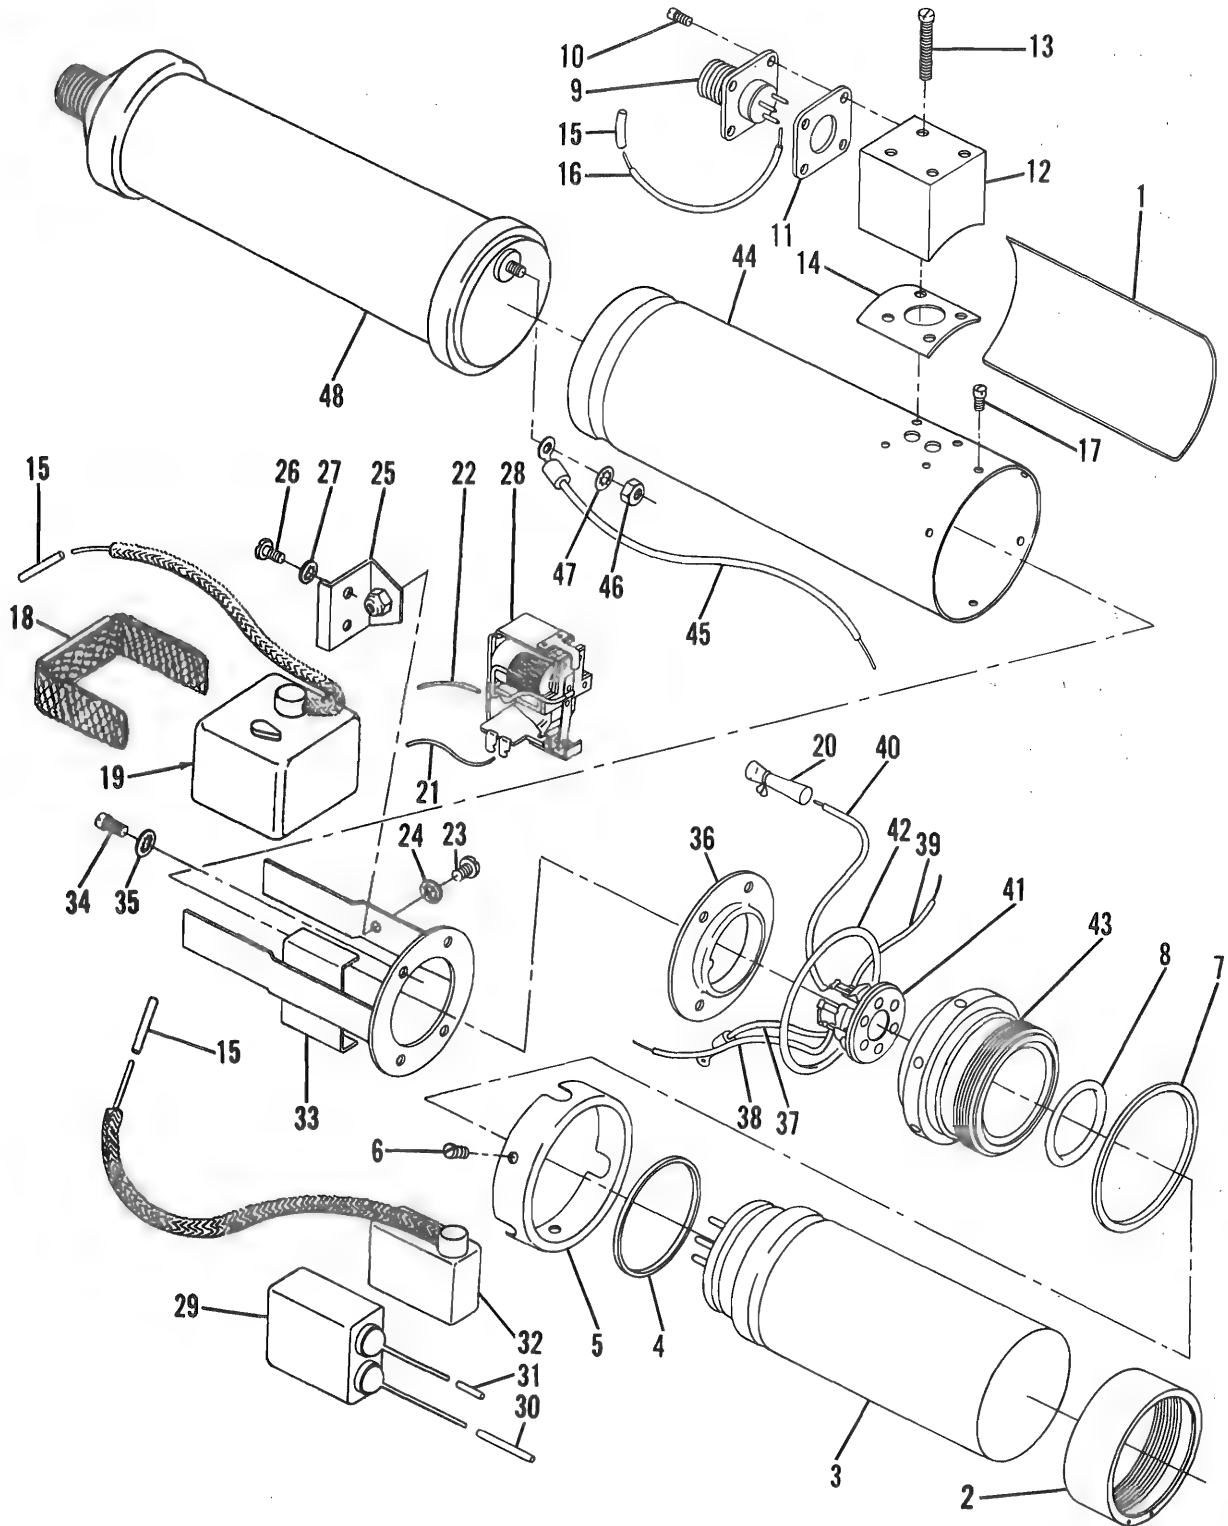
Ignition Assembly (Sheet 1 of 2)
